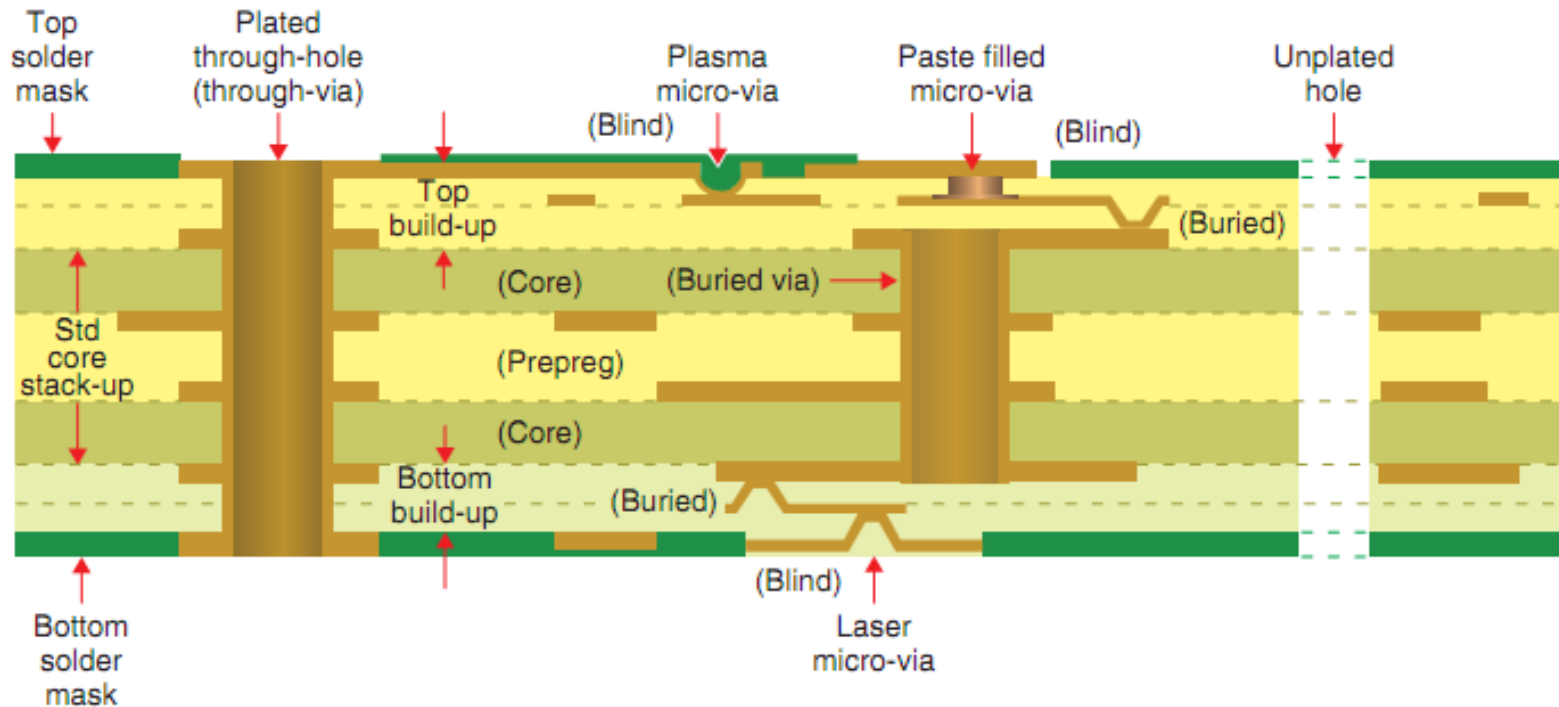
A built-up, multitechnology, PCB stack-up.
